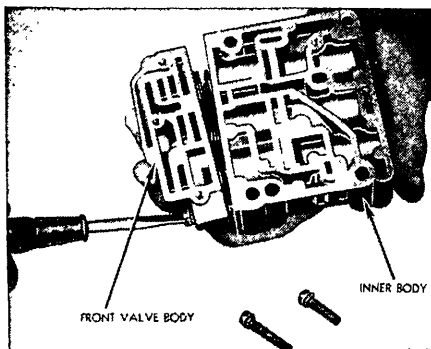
Hold front valve body and inner body together while removing screws to avoid springs jumping out of place
